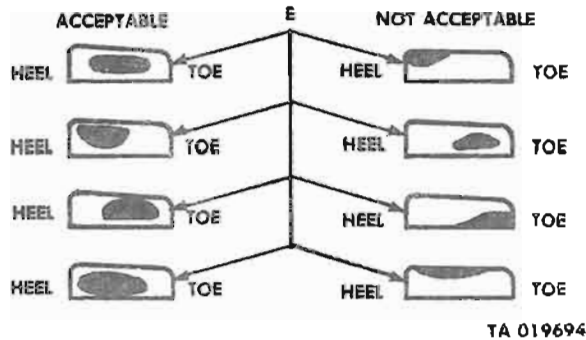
Sample Ring Gear Patterns Under No-Load Conditions.
